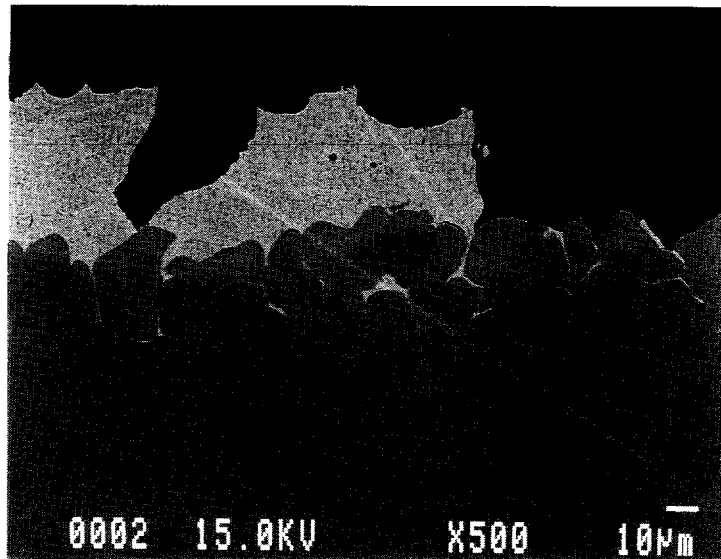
Fracture surface of the BNi-5 brazed joint tested at 873K.
